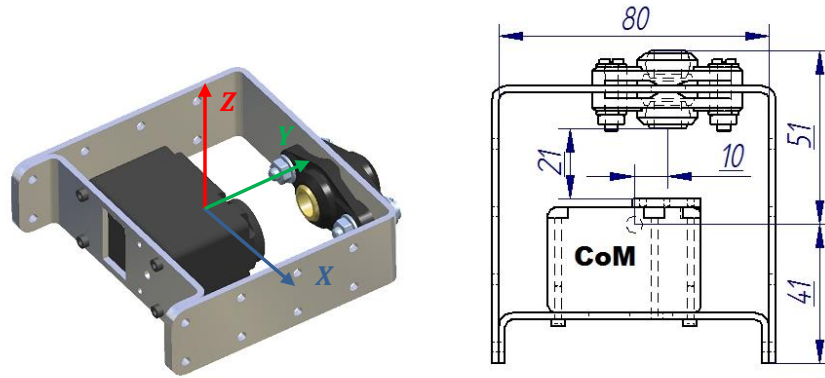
CoM and dimensions (in mm) of the shoulder pitch structure.
